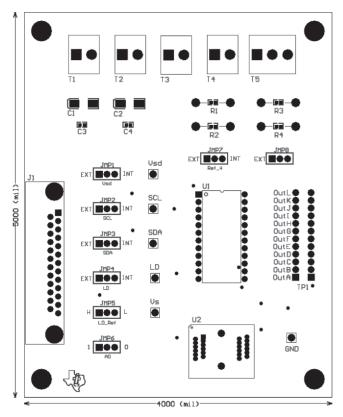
BUF12800EVM PCB Top Layer (Component Layout)
